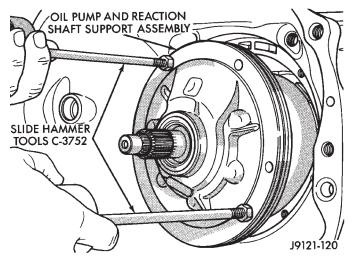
Removing Oil Pump And Reaction Shaft Support Assembly
